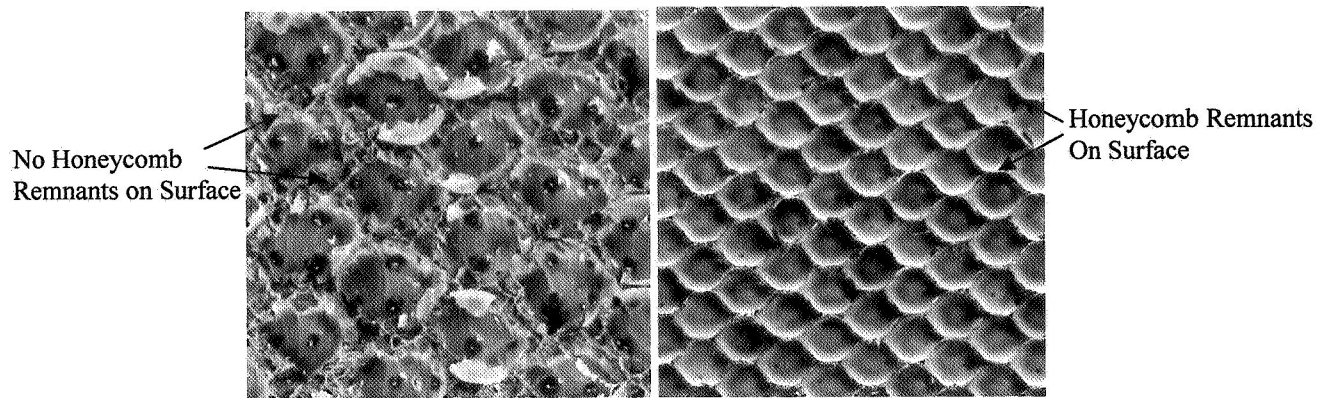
Surfaces of facesheet after CDP tests for a bondline failure (left) and core failure (right).
